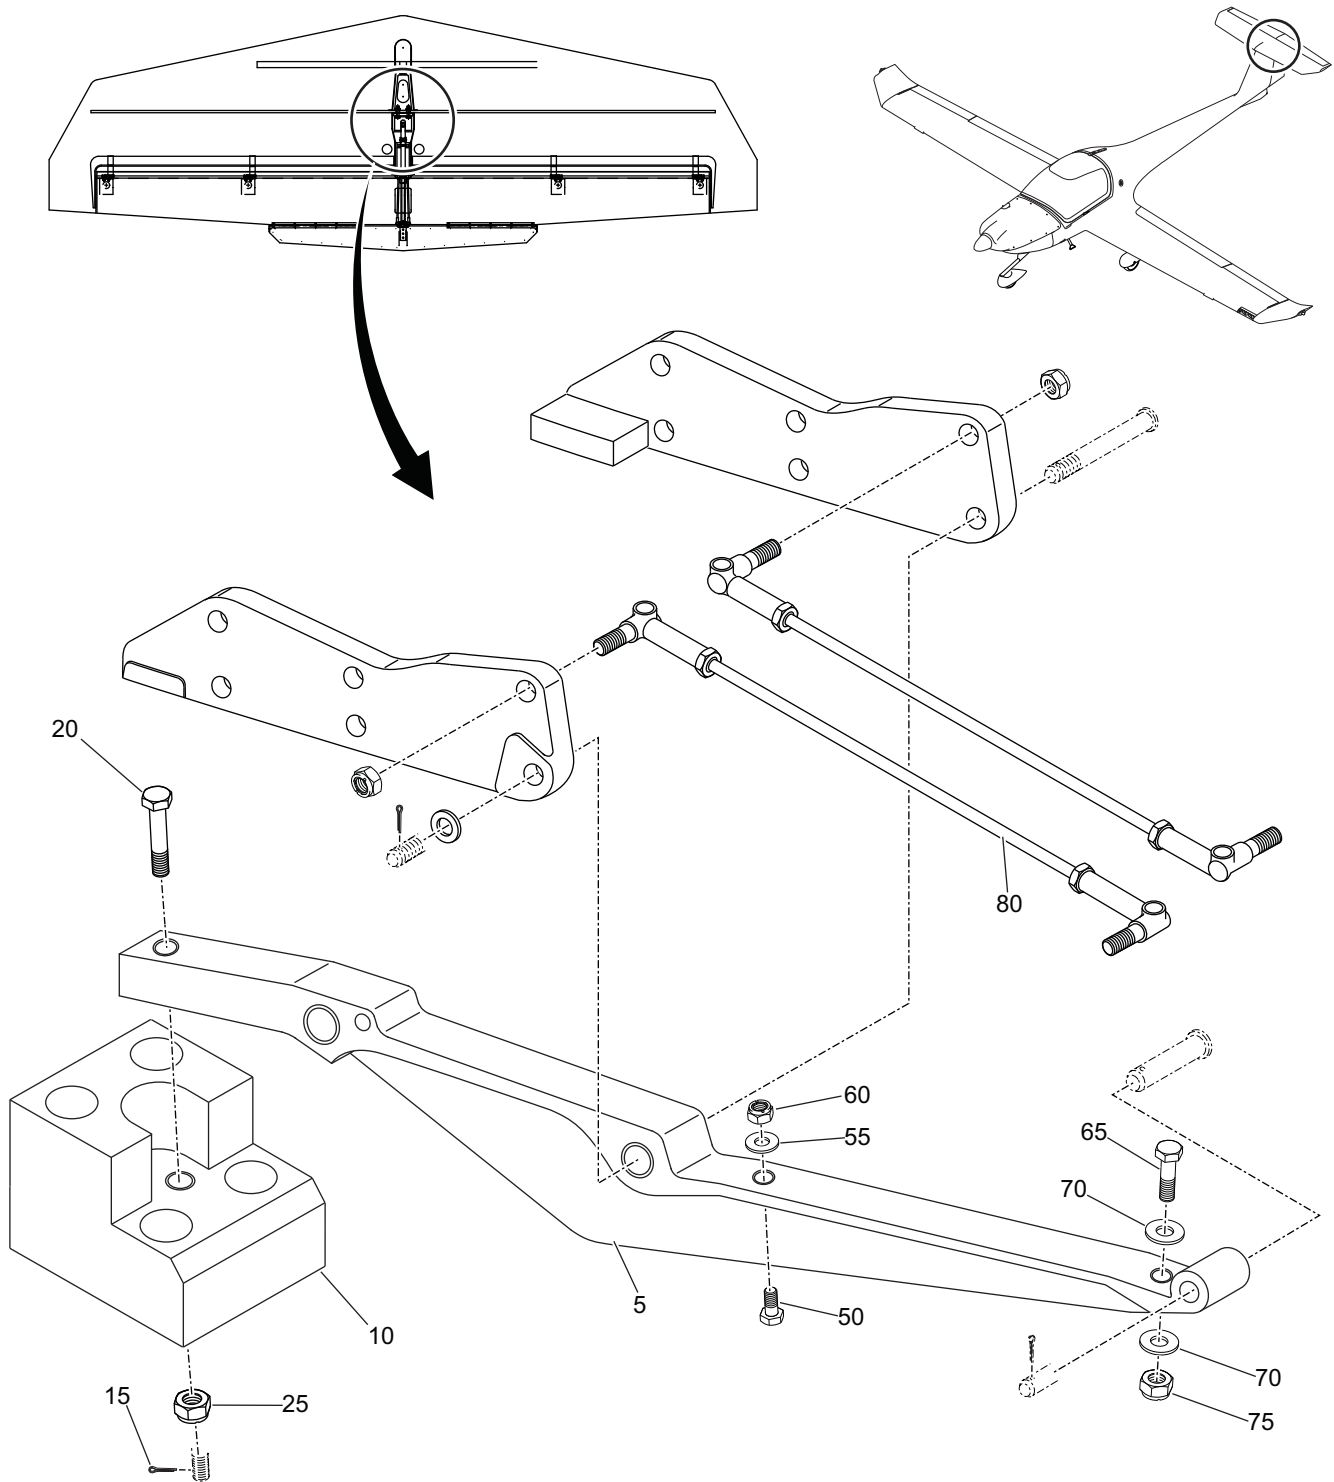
Elevator Bellcrank Installation (Sheet 1 of 2)
